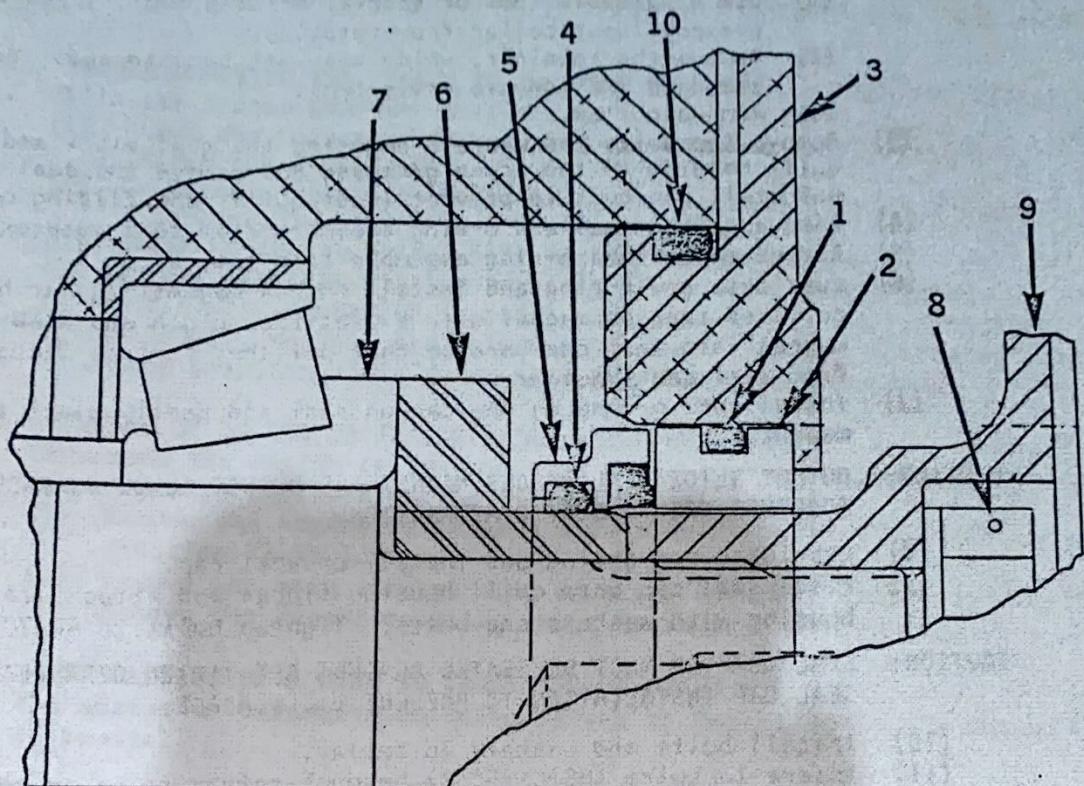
MAGNETIC SEAL, INPUT QUILL ASSEMBLY
